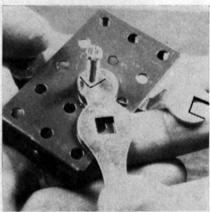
(left) Correct use of the Spanner with a simple assembly. The Nut is held still and the Bolt is tightened with the Screwdriver—not the other way round.
